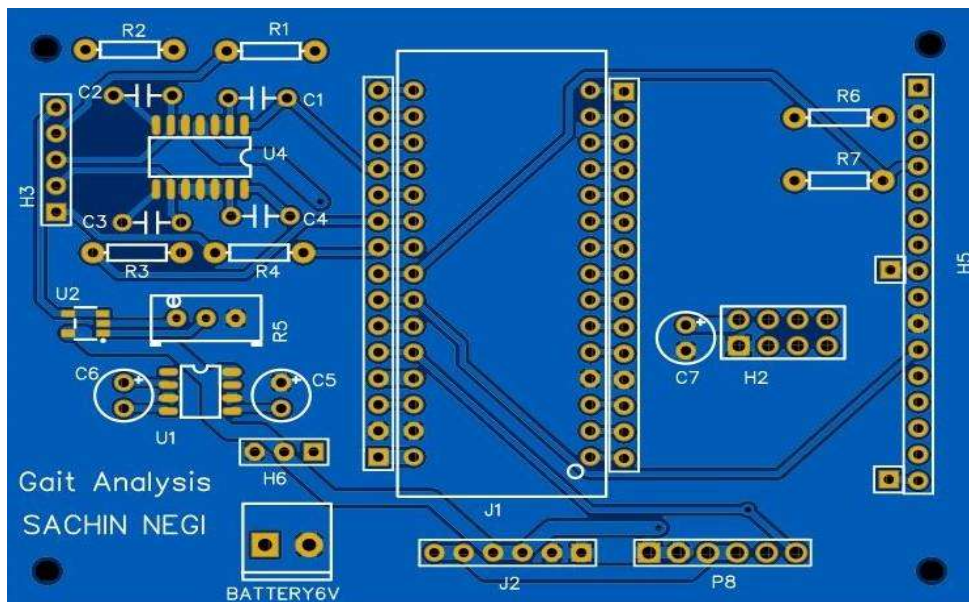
Printed circuit board 2-D view for gait analysis using FSR, IMU, and EMG sensors
